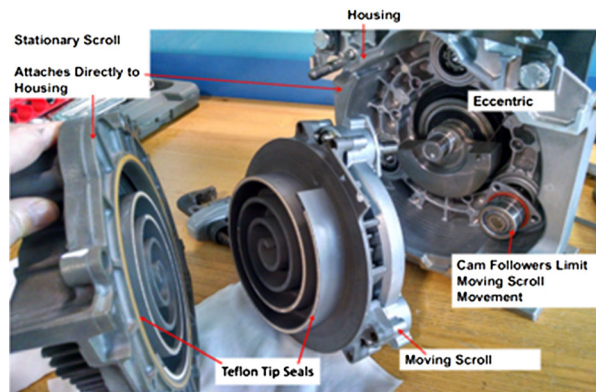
The MOXIE scroll compressor, disassembled (Hecht et al., 2021).
